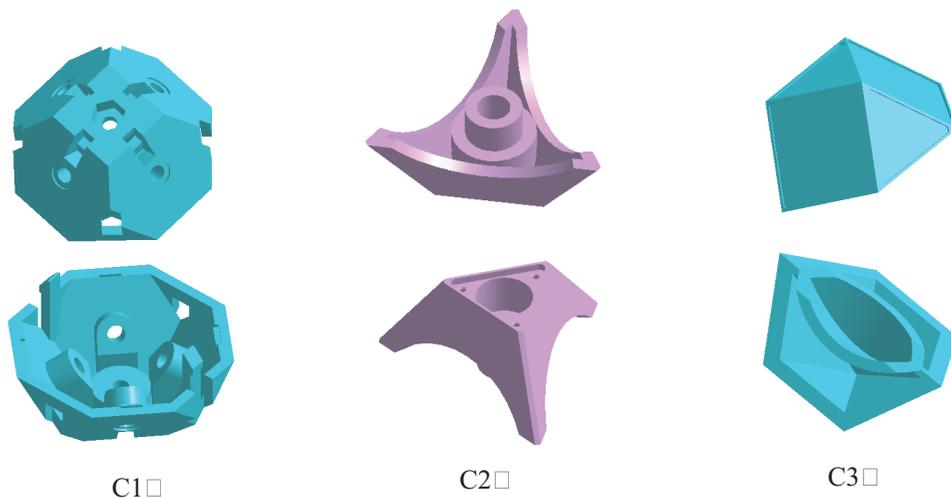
Component parts of “RainbowCube”, Center unit (left), Rotation center unit (middle), Moving unit (right).
